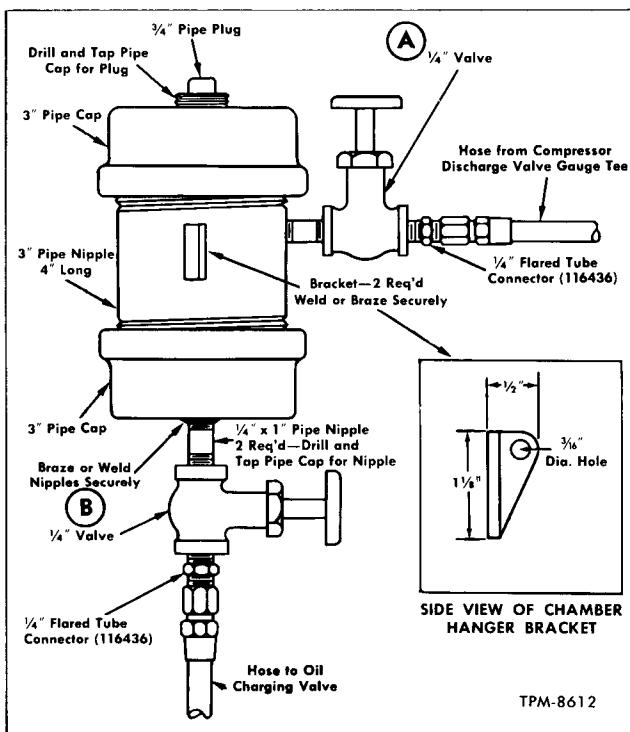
Fabricated Chamber for Adding Oil to Compressor
